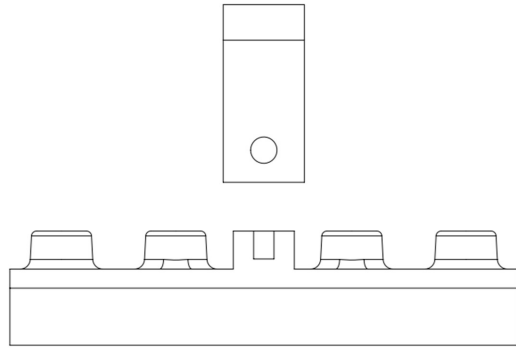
Front Exploded View of Assembling C-Clamp Arm to Base
